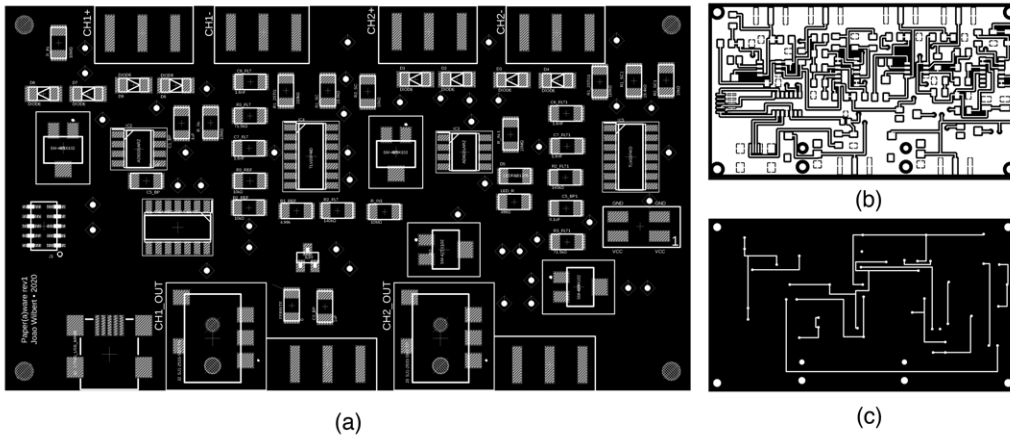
(a) PCB layout with component placement (b) PCB top layer (c) PCB bottom layer
